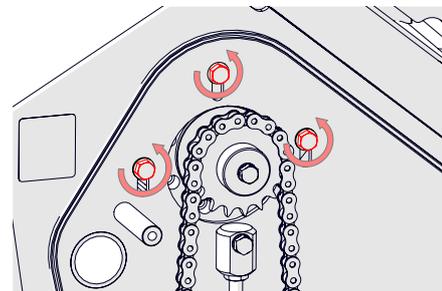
B - Loosen slightly the motor 3 x top nuts.
